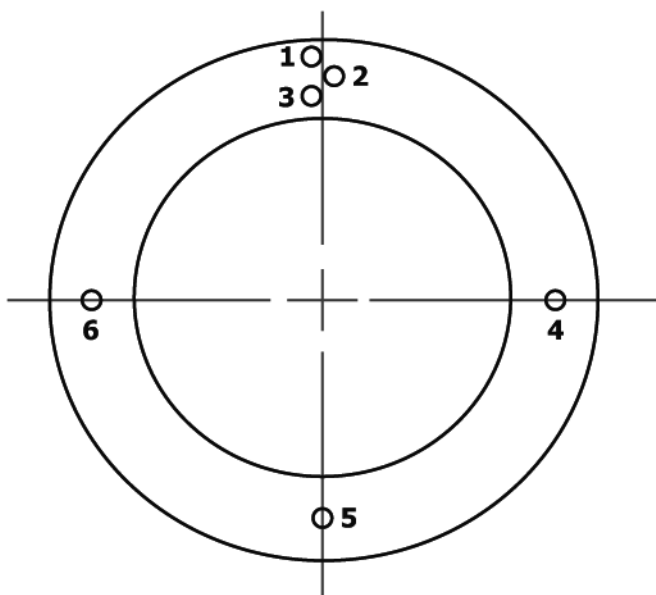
Sample Location For Degrees Of Crosslinking Test On Thick-Wall Pipe
